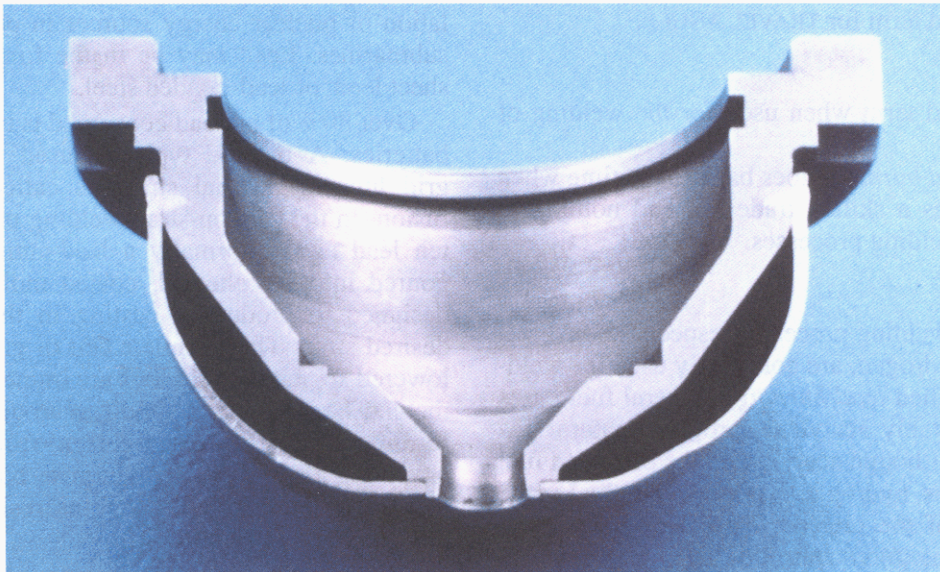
Cross Section of a Laser Beam Weld Joining a 416 Stainless Steel Cap to a 310 Stainless Steel Body
